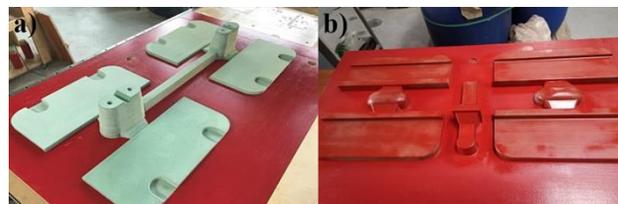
Molding in OMEGA device: a) upper model plate for molding; b) bottom plate for the molding
